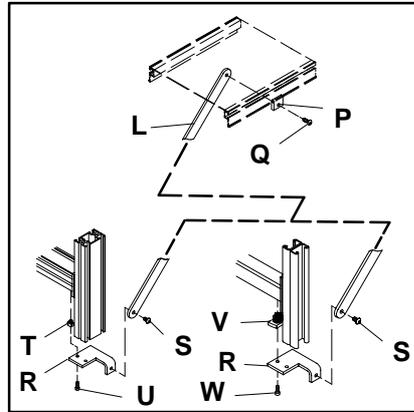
Aluminum Stand (left) & Steel Stand (right) Diagonal Brace Connection to 2100 Series Conveyor
